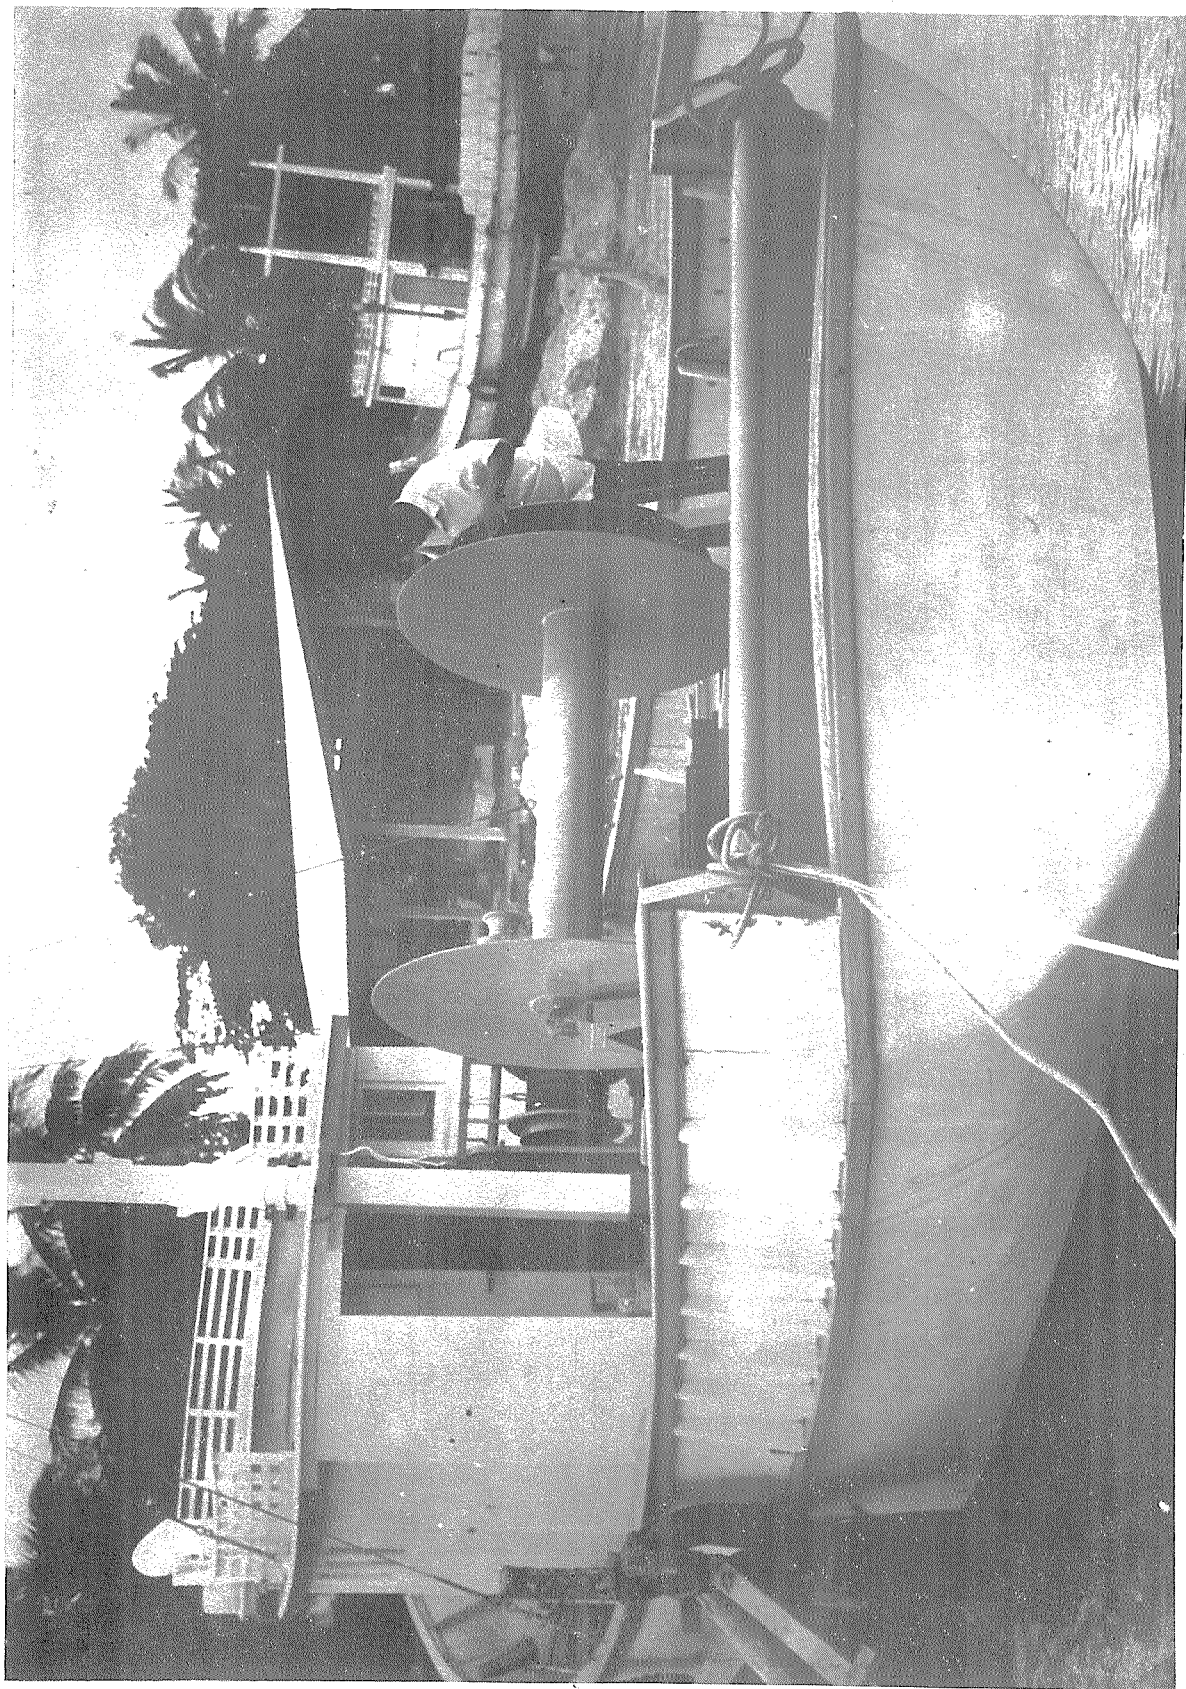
Fitting out. The trawl drum and stern roller in place.
